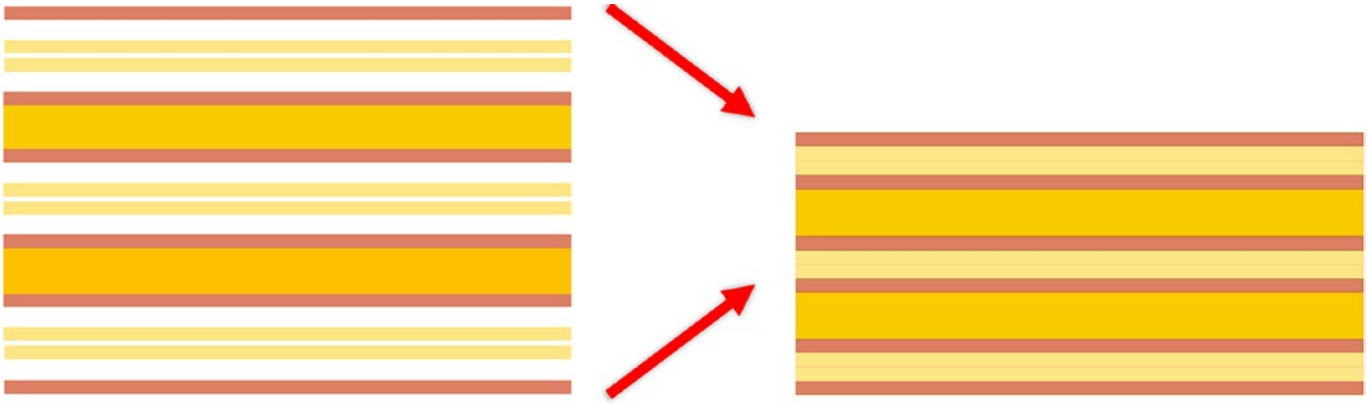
Material layout shown on the left is pressed into a single package with multilayer lamination.
